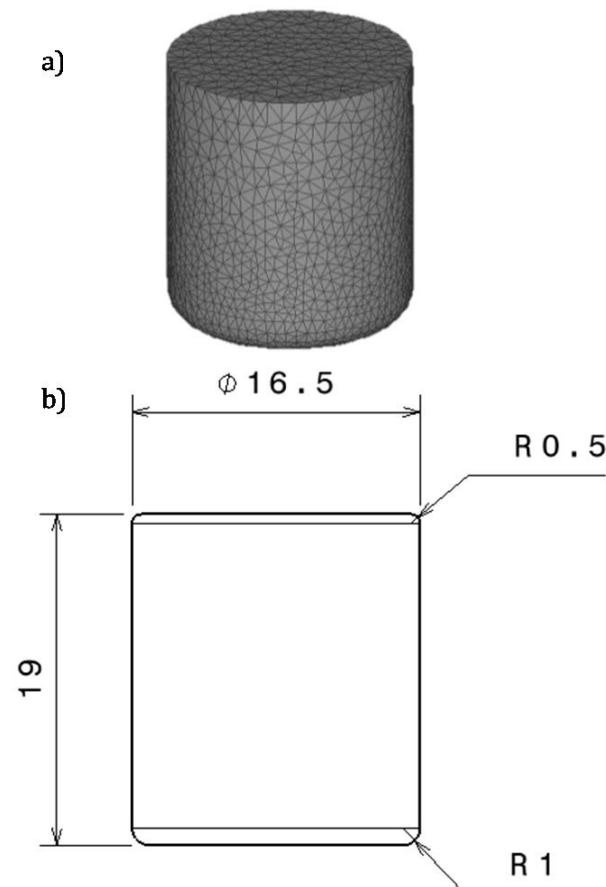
Initial billet model a) Finite-element model of billet b) Geometric dimensions of billet
